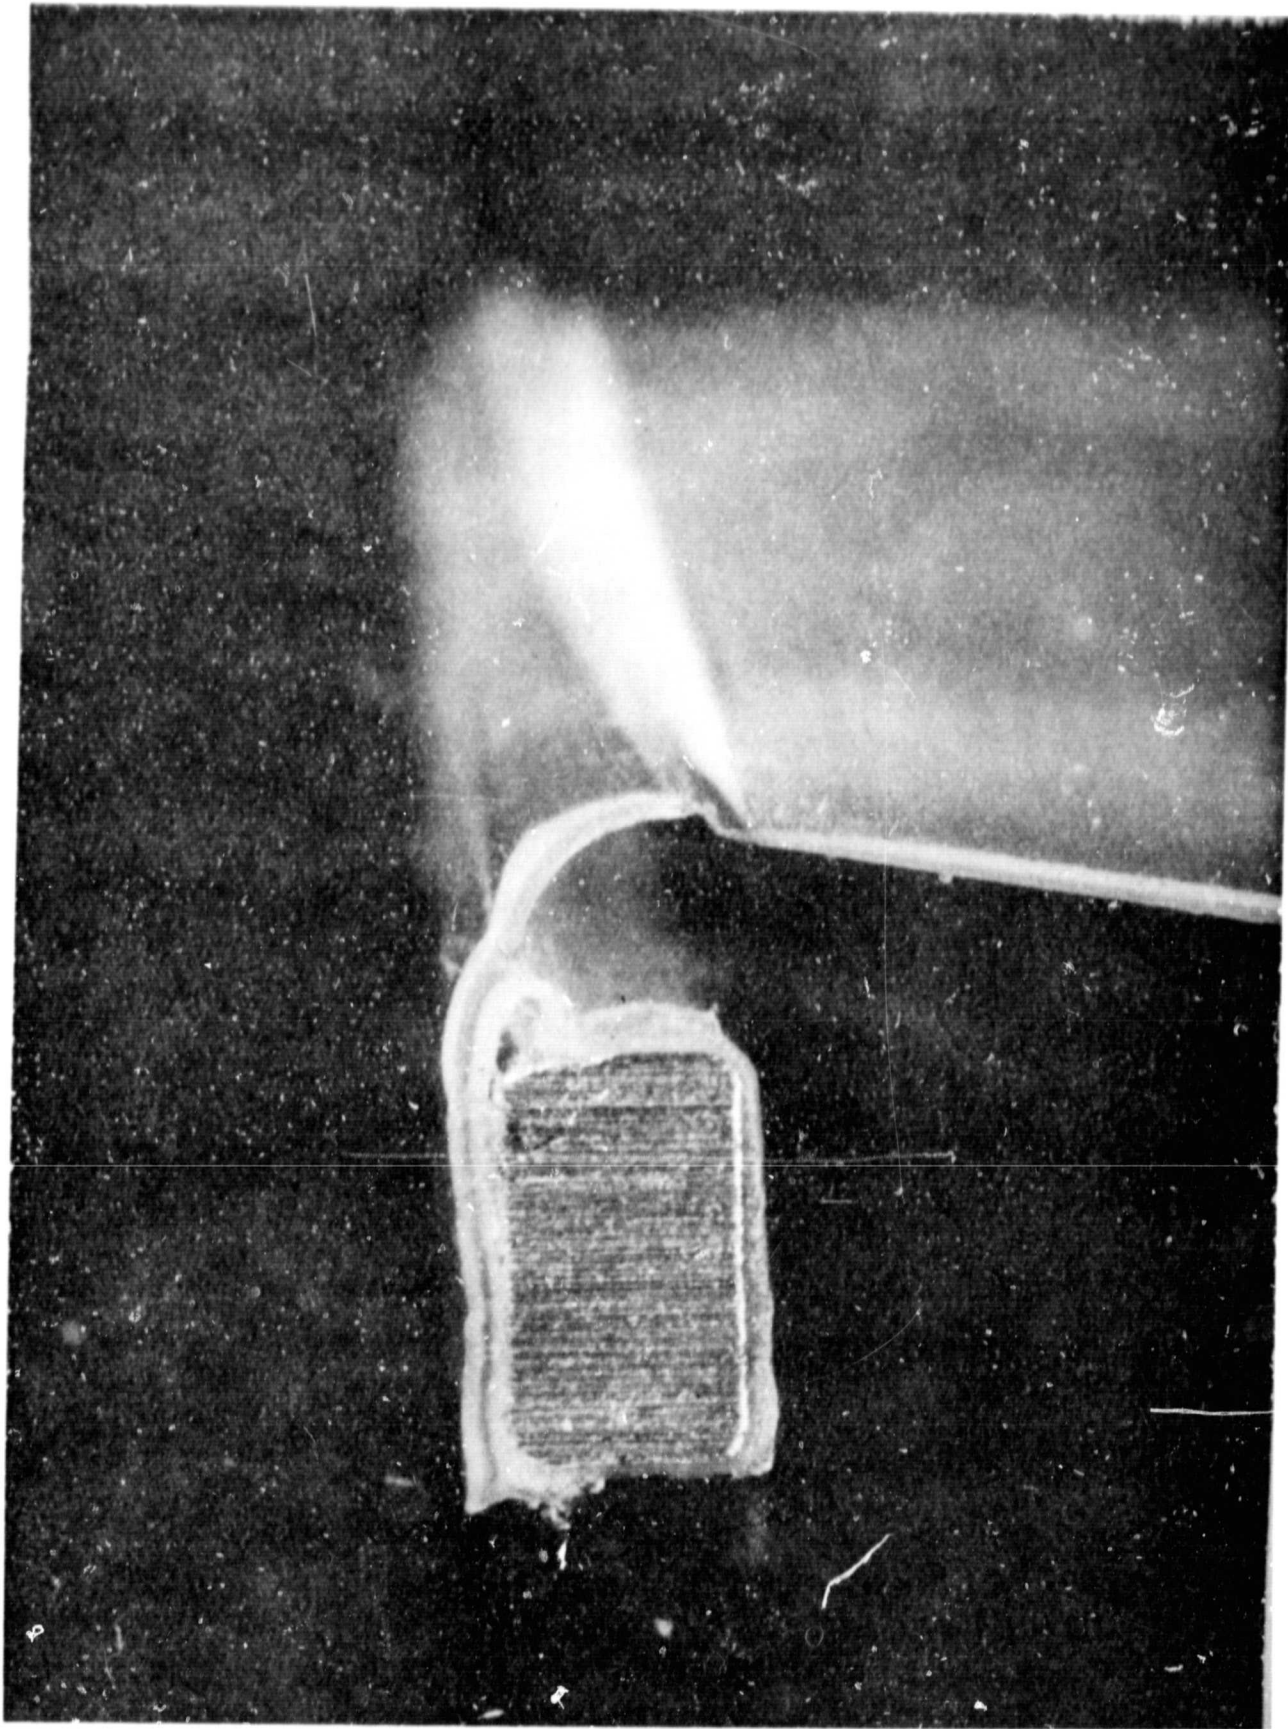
OXIDIZER GIRTH SEAL-SECTIONED VIEW
